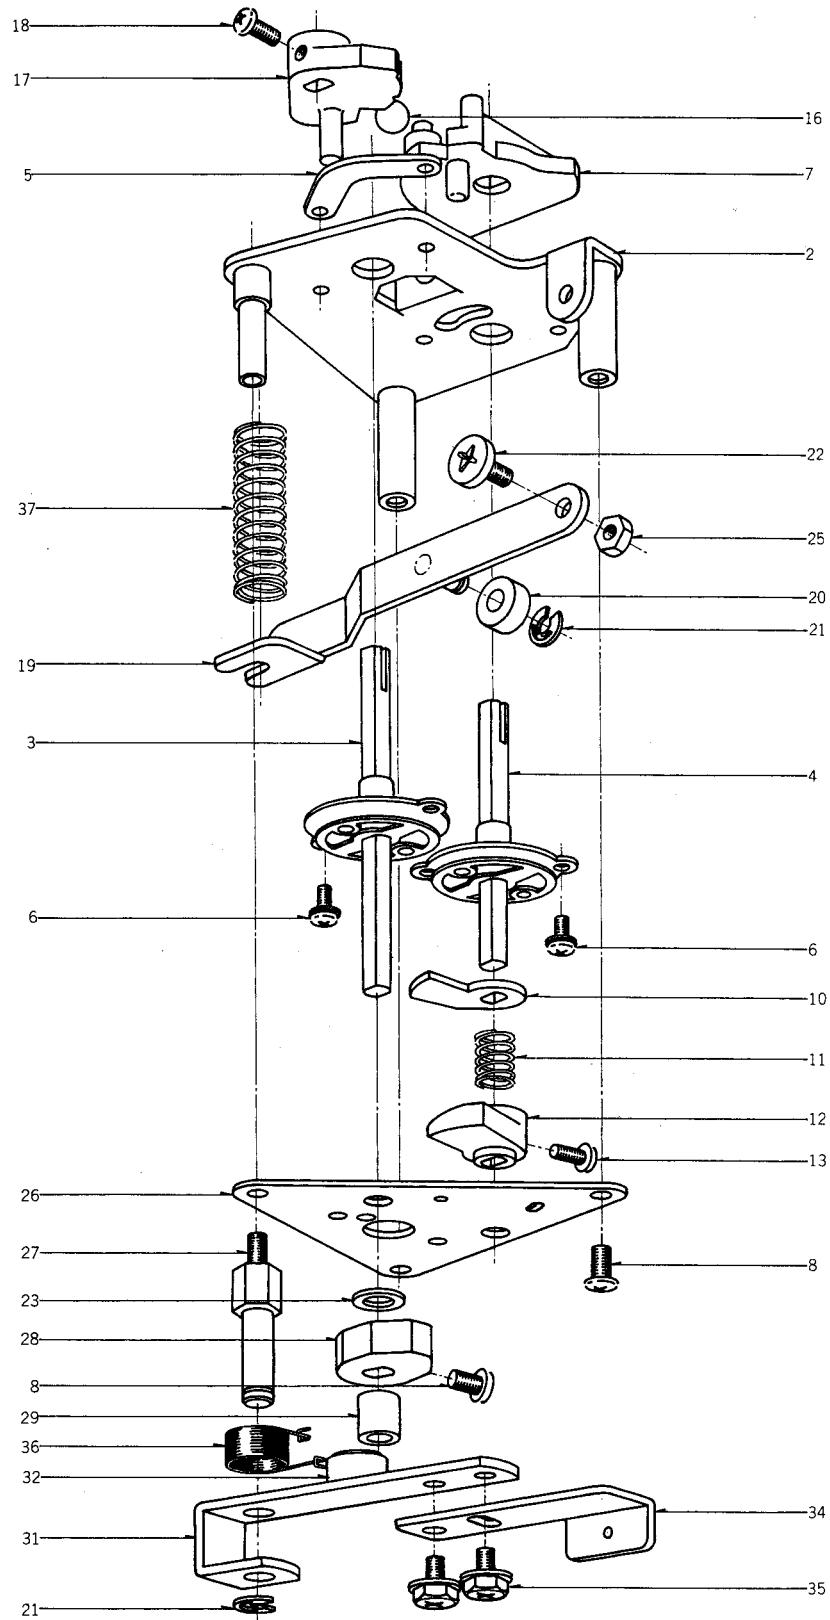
ILLUSTRATION OF MECHANISM ASSEMBLY BLOCK
